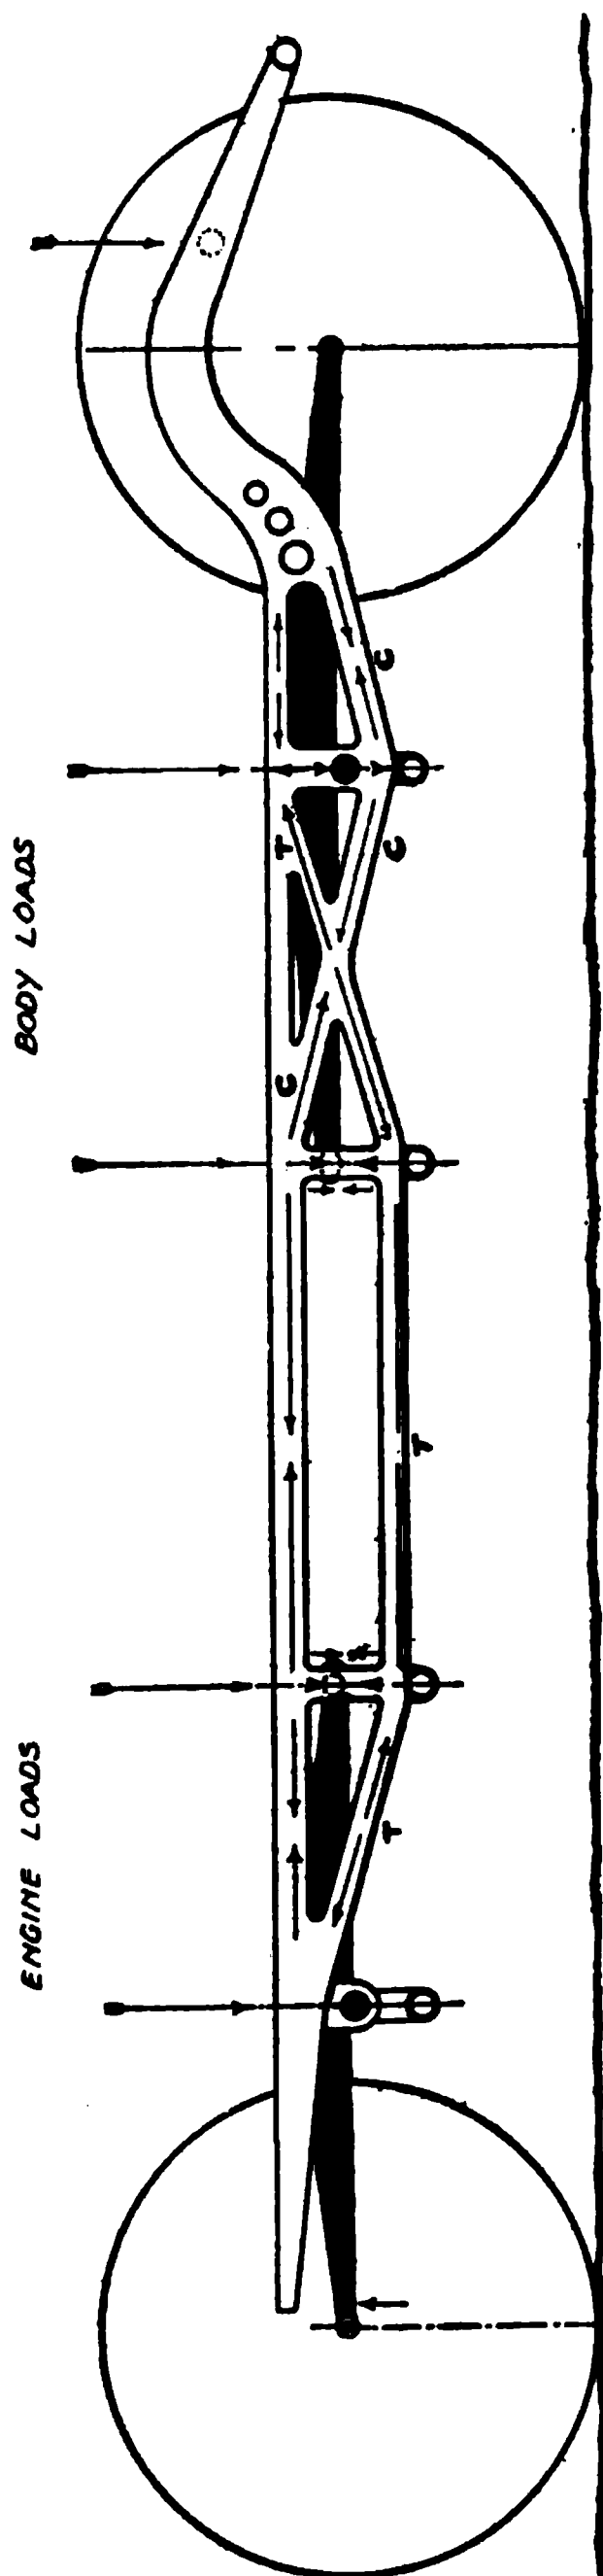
Diagram of Fergus Trussed Frame, Showing Light but Strong Construction
